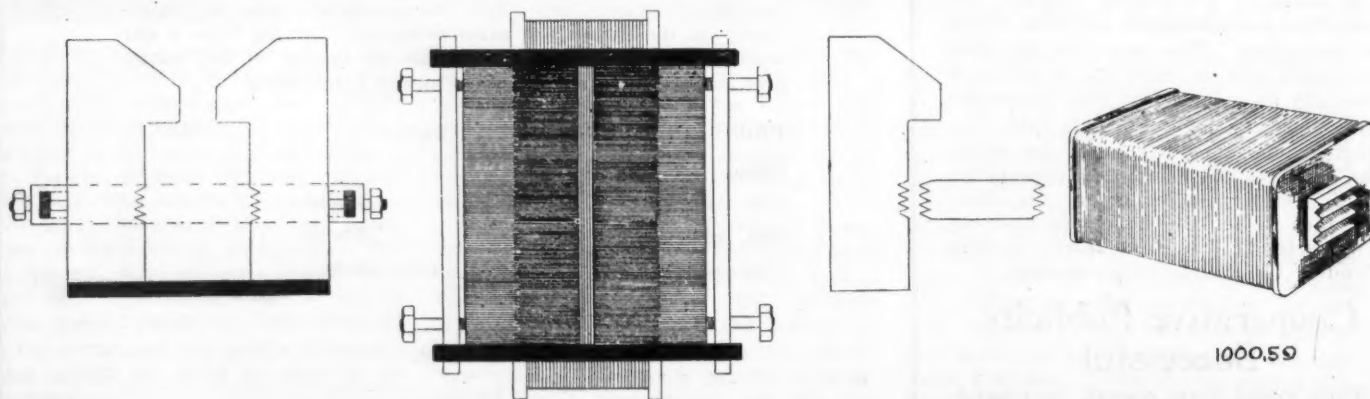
Detail of armature testing "Growler." Left; sectional view of iron parts. Center; finished apparatus viewed from top. Right; the coil and core
